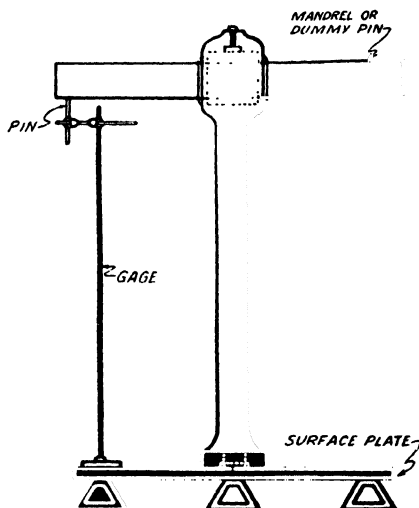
One method of checking the bore of the piston-pin bearing relative to the large end of the connecting rod.
